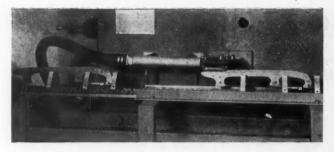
Conveyor, Coil and Quench Table for Hardening Running Edges of Ice-Skate Blades (Courtesy Induction Heating Corporation)
